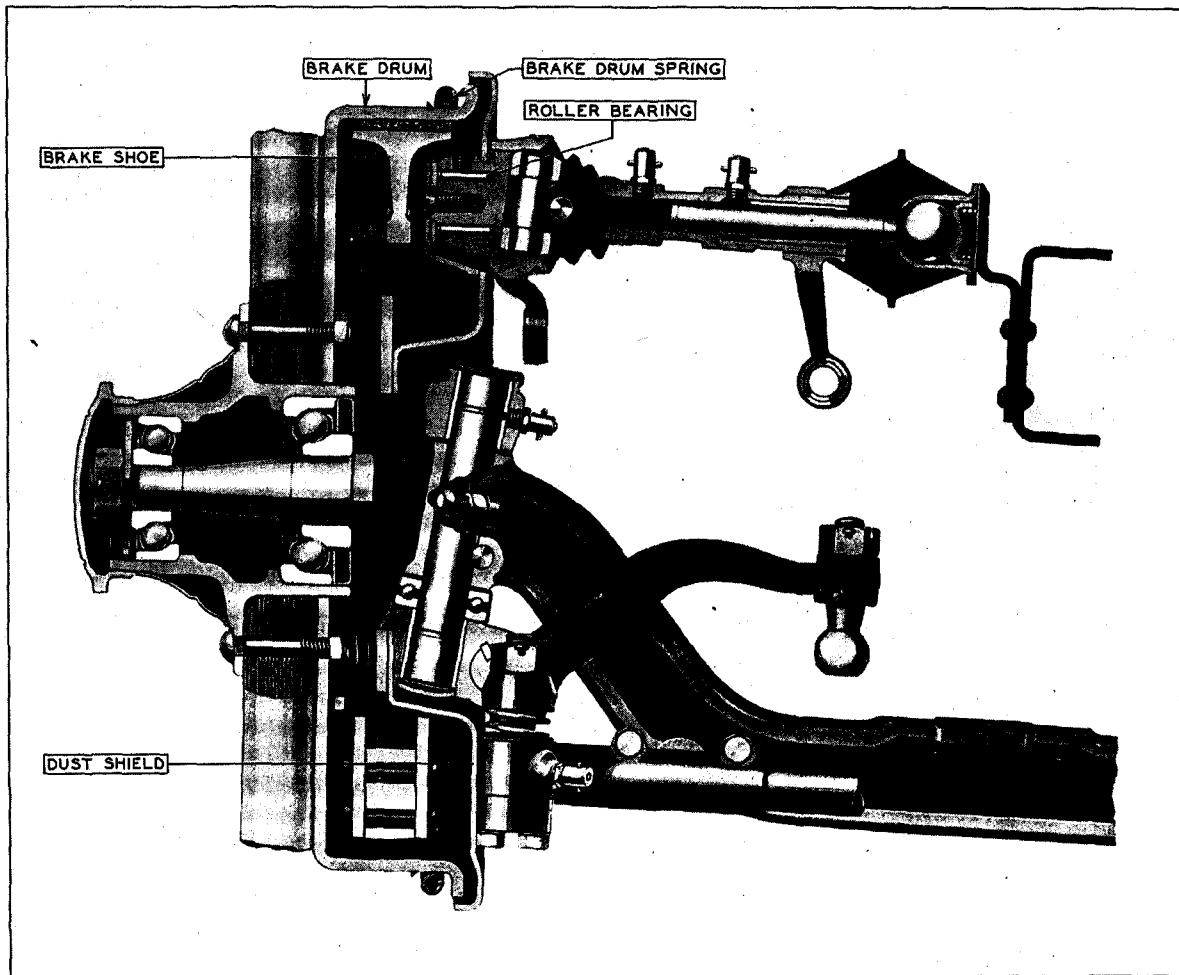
Sectional view of the LaSalle 328 left front wheel and steering knuckle.
